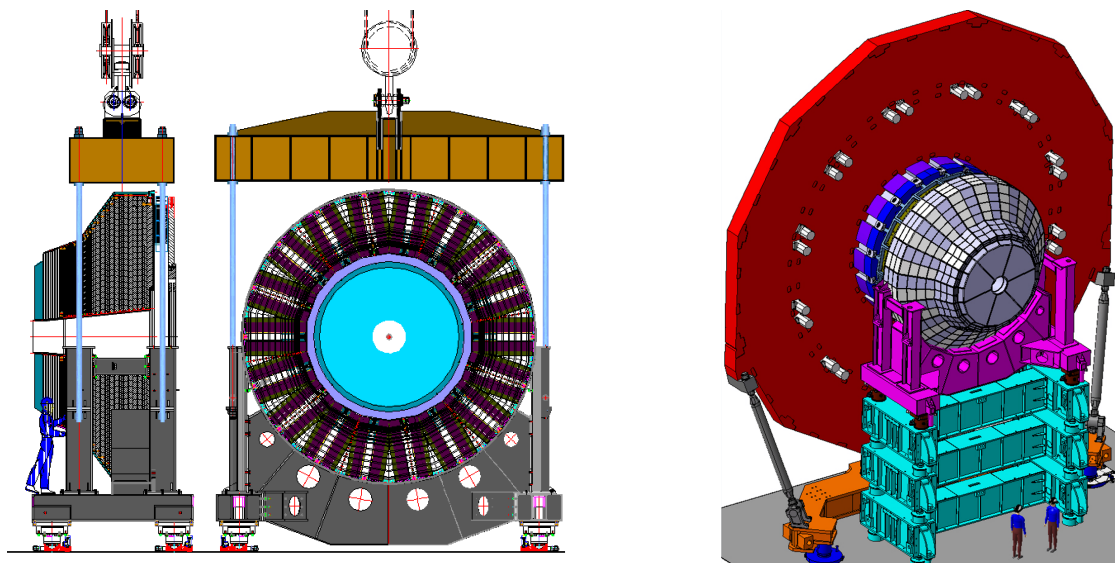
Endcap support cradle and spreader bar used for lowering one endcap of HGCAL from the surface assembly building into the experimental cavern (left). Hydraulic riser system used to elevate and position the HGCAL for connection onto the YE1 (right).
